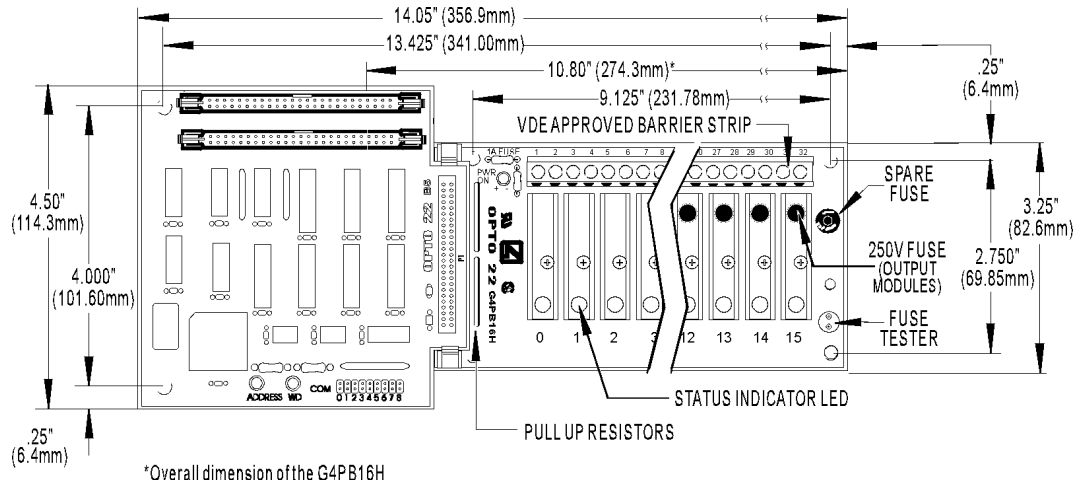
Mounting Dimensions of the G4PB16H with a B5 Installed
